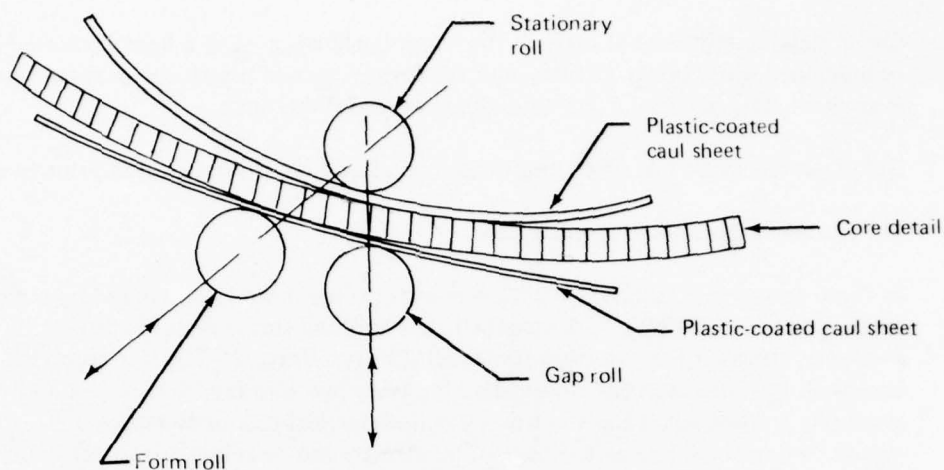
Pyramid-Type Pinch Roll Used to Form Honeycomb Core
